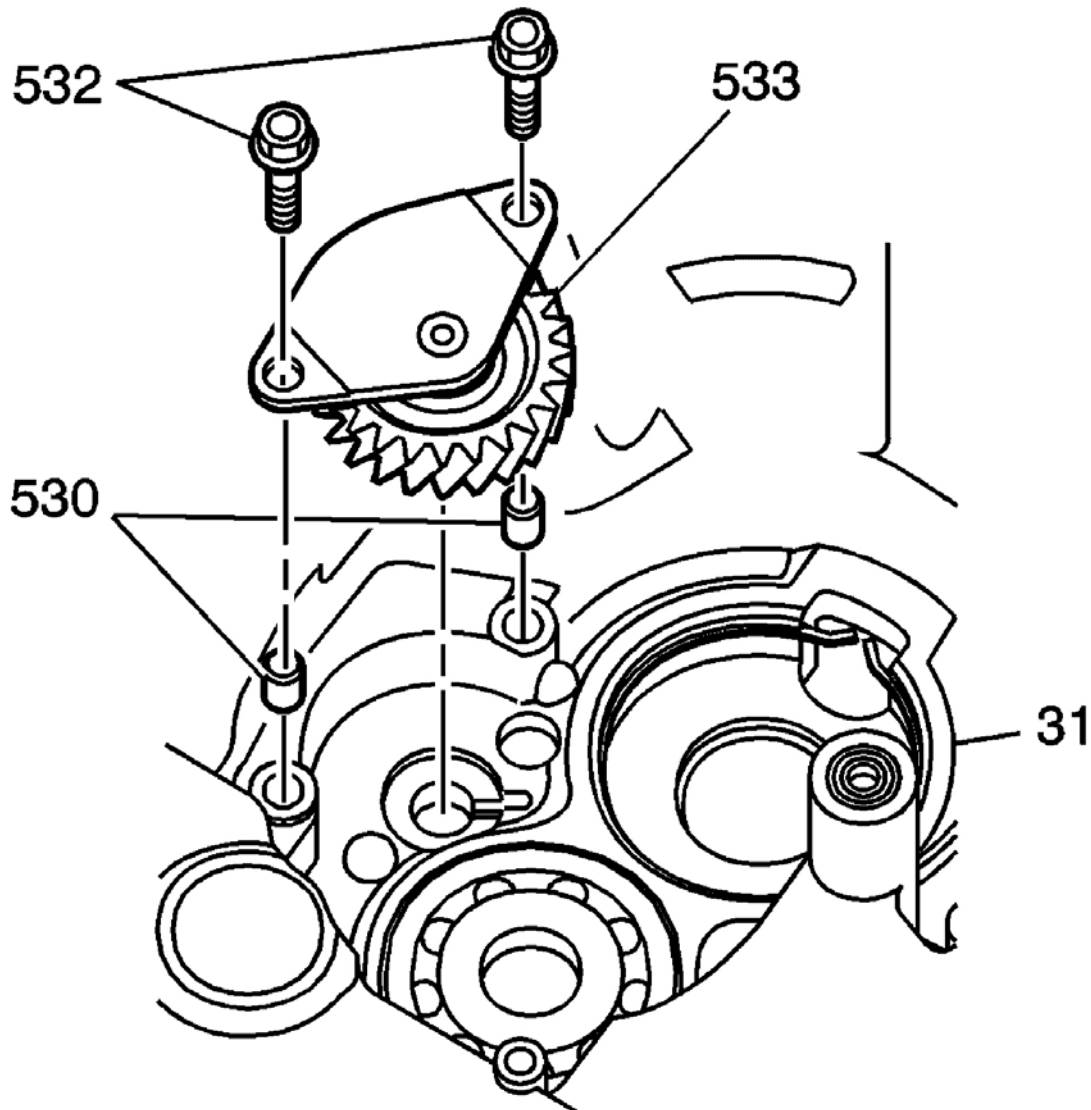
Reverse Idler Gear Assembly, Bolts & Pins
